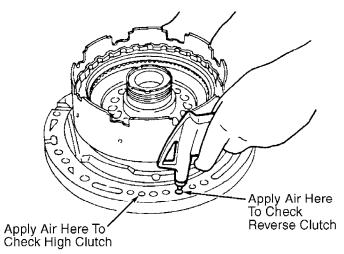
Checking Reverse & High Clutch Operation Courtesy of Nissan Motor Co., U.S.A.
